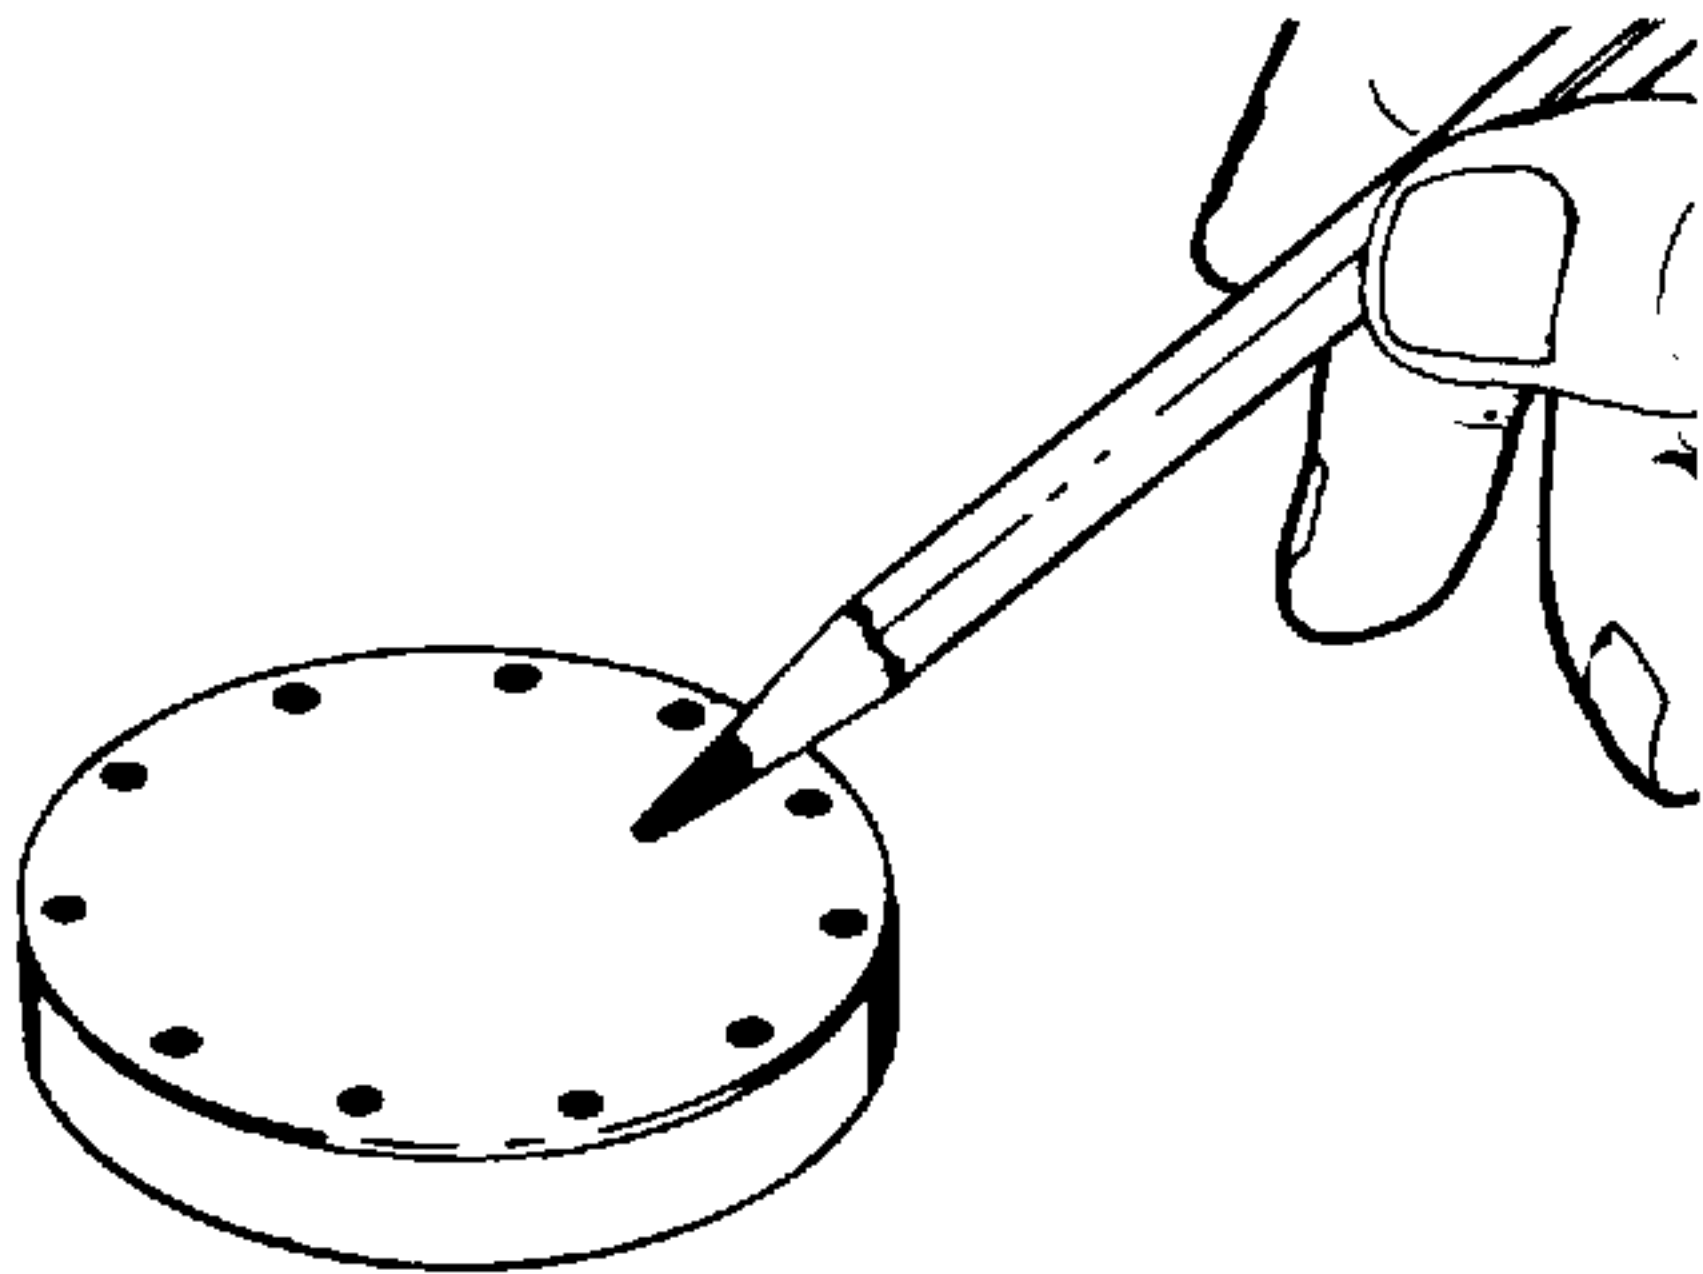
Inspecting the Rotor Side of the Drive Plate.
